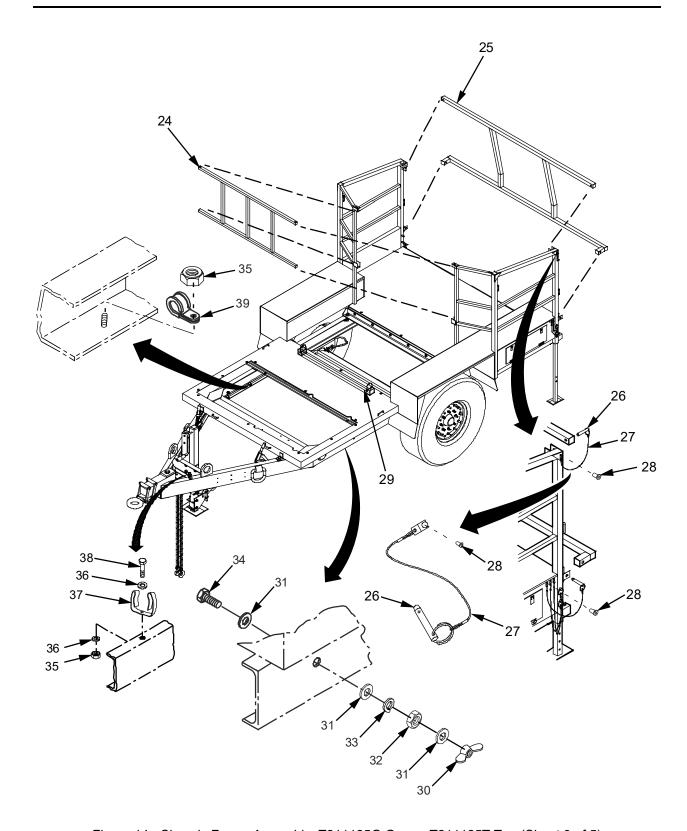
Chassis Frame Assembly, T211125G Green, T211125T Tan (Sheet 3 of 5)
